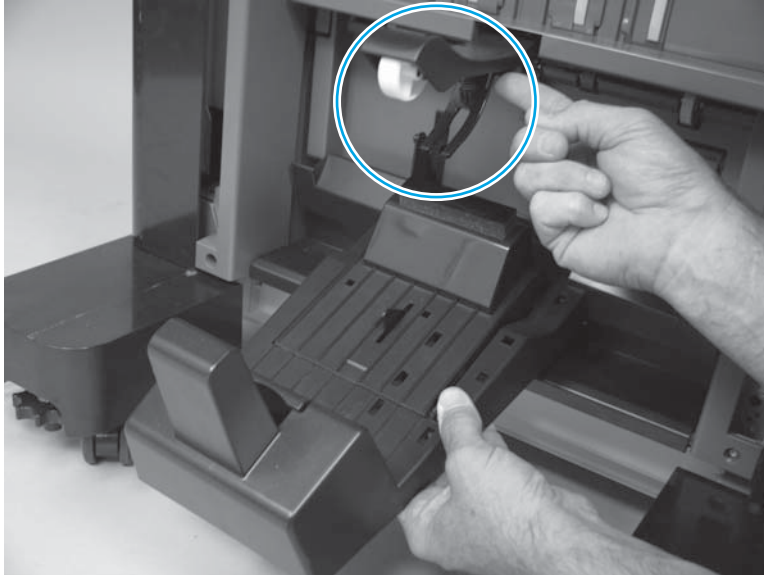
Remove the saddle output bin assembly (2 of 2)
